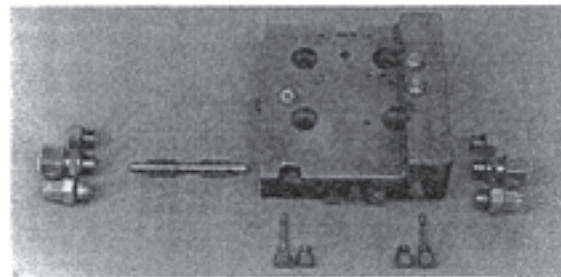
Multi-function Block With PCOR Defeat Spool Components
